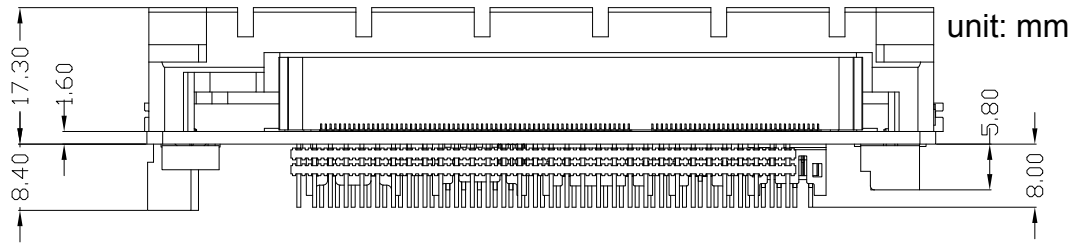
MIO-2262 Mechanical Drawing (Side View with Heatsink)
